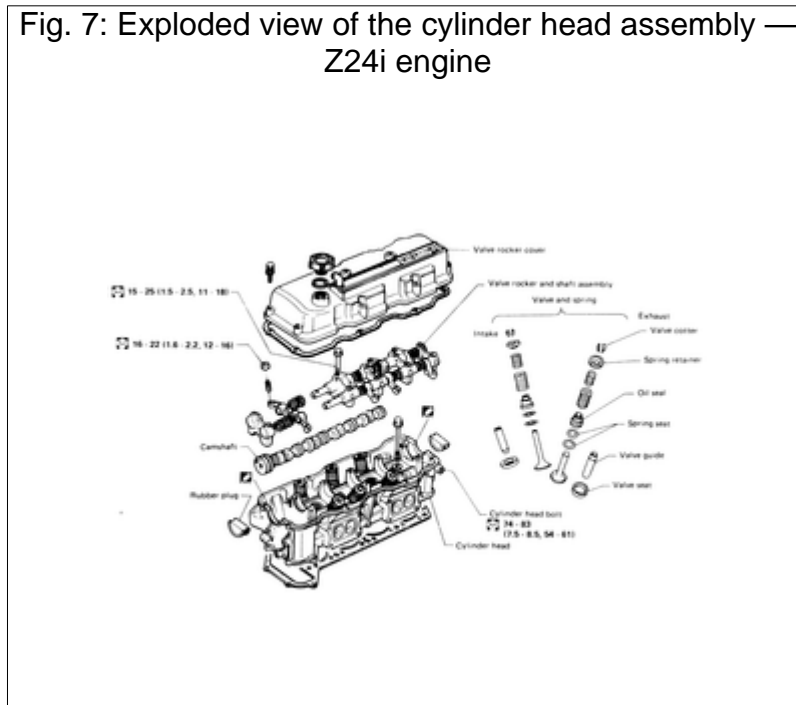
Exploded view of the cylinder head assembly — Z24i engine
